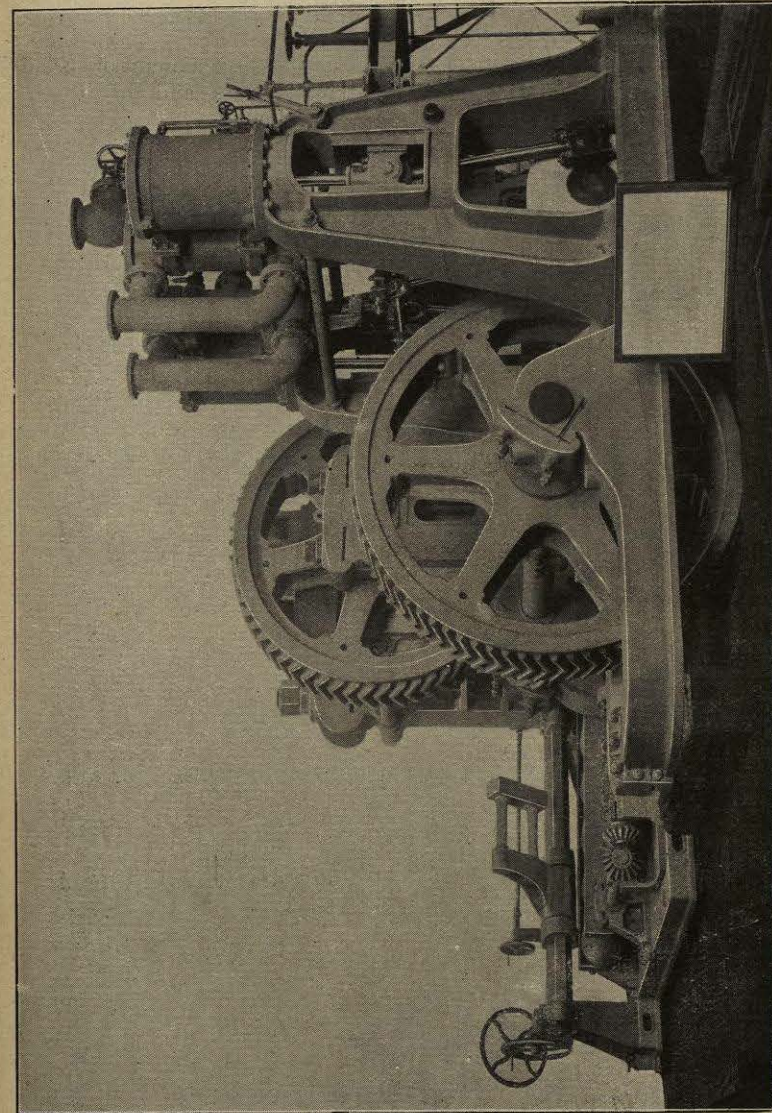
Bloom-Shearing Machine—View showing Measuring Stop.
